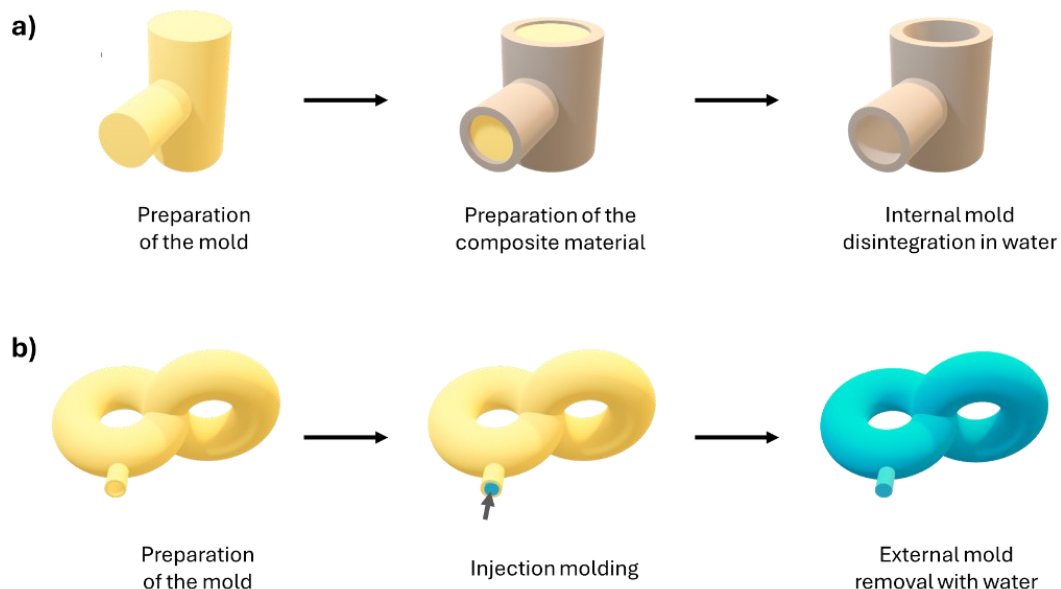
3D printed a) internal molds for complex shape carbon fiber composite materials, and b) external molds for injection molding of complex shape object.
